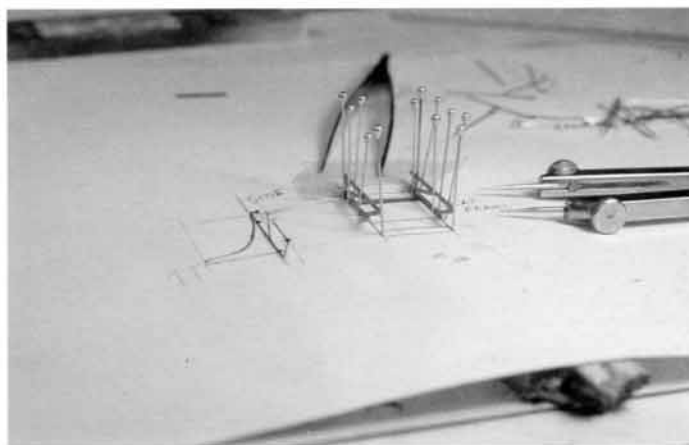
Once the sides are completed, position them on the front view drawing. Again position the parts with pins and then glue the cross-sectional members in place.
